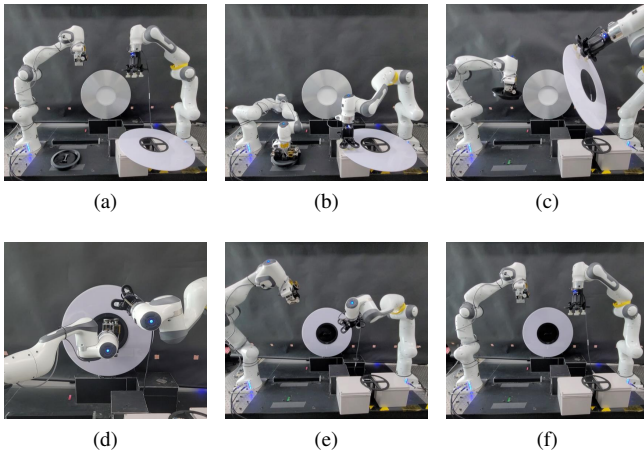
Snapshots of the layered peg-in-hole assembly: (a)-(b) Grasping. (c) Planning. (d) Assembly execution with the proposed assembly strategy. (e)-(f) Returning.
